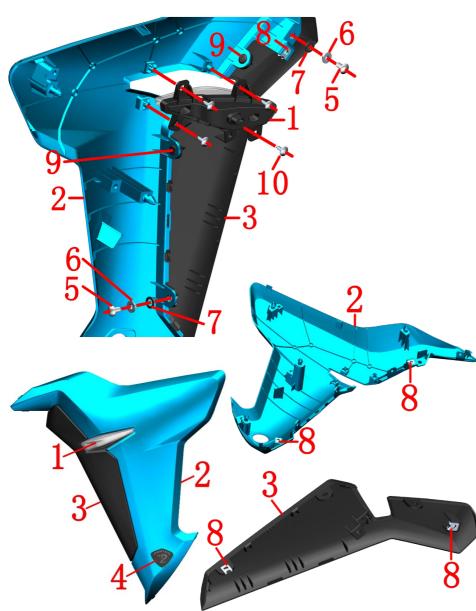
SU	JRROUNDING	Left surround panel assembly	CHK	40)
